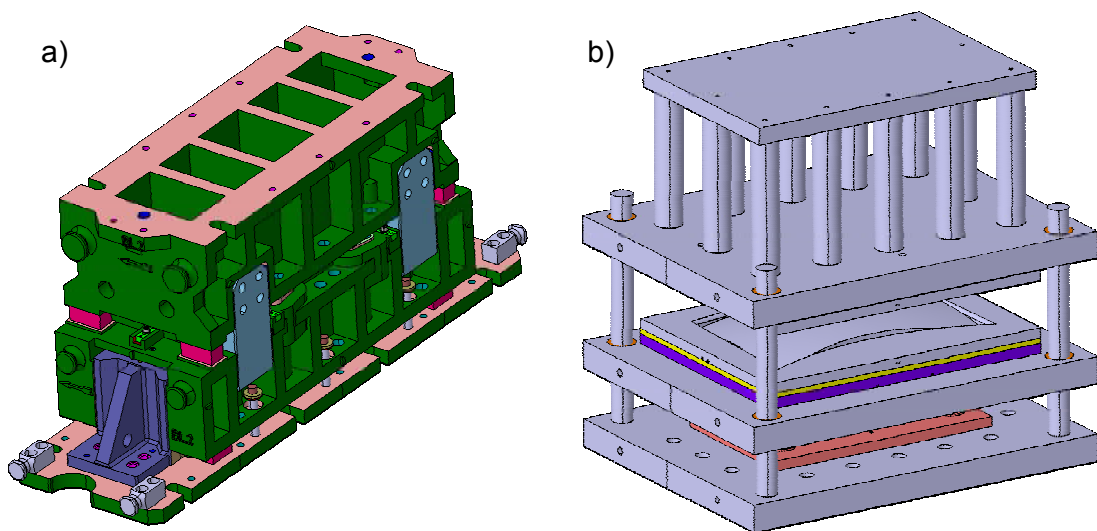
Investigated industrial a) and experimental b) sheet metal forming tools.
